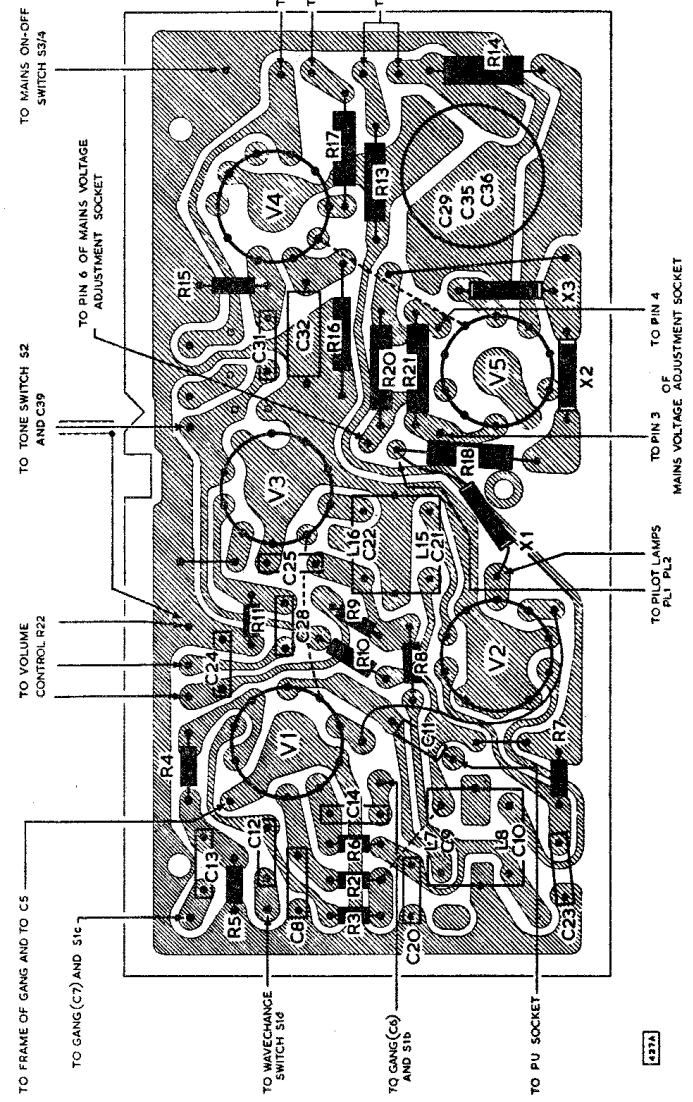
Component side view of printed board. Note : R23 is beneath the board and is not shown.
